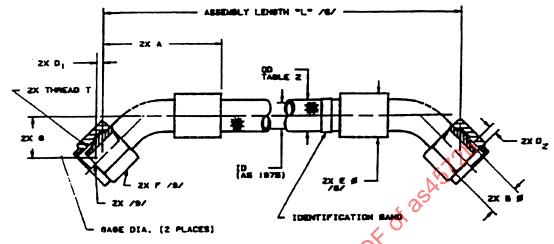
HOSE ASSEMBLY, 45° ELBOW TO 45° ELBOW
